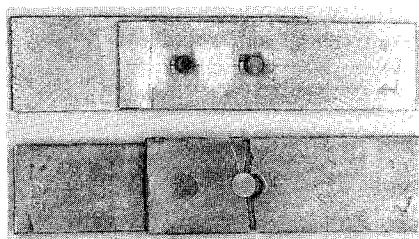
Failure modes of riveted B/Al specimens. The unheat-treated specimen (above) failed in bearing; the heat-treated specimen (below) failed in net tension.
